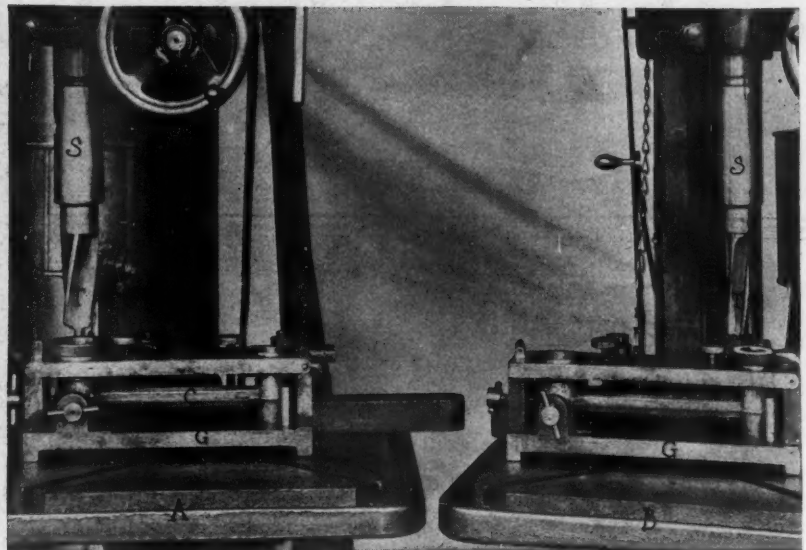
JIGS FOR DRILLING ENDS OF CONNECTING POLES
